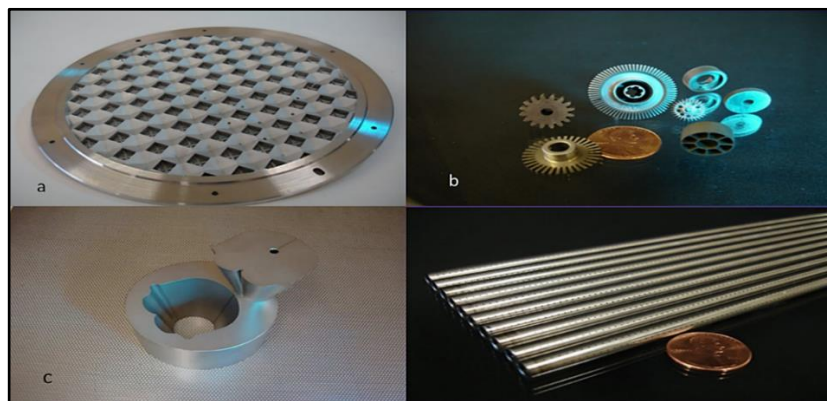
Some examples of EDM's work a- Optic Reflector section machined using EDM, b- Aerospace EDM rocket nozzle, and c- Extruded EDM of die components drilling a small hole of a gas tube [4].
